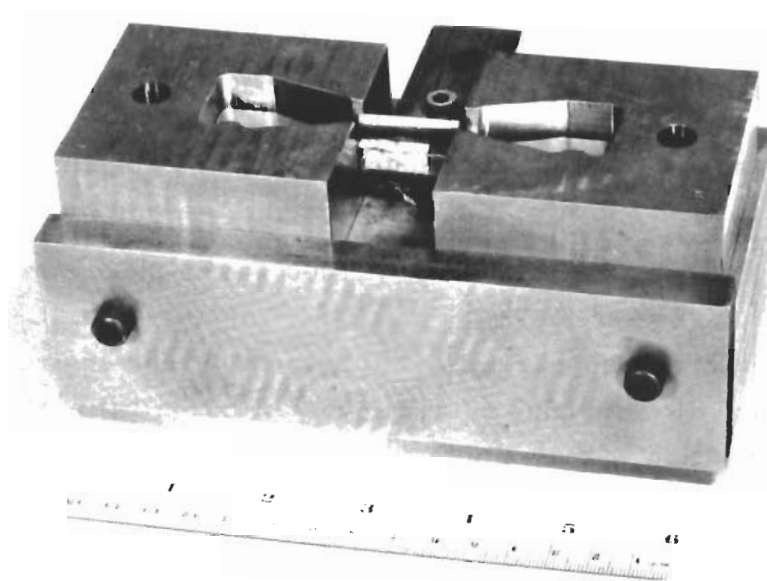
PRECISION TENSILE SPECIMEN
